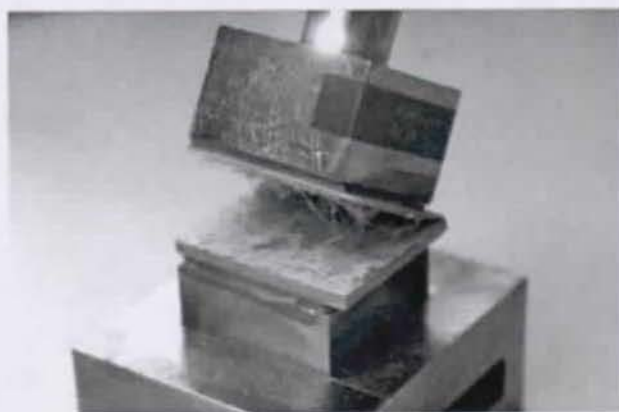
A $40 \times 40 \text{ mm}^2$ epoxy bonded specimens after failure: pure out-of-plane tests
